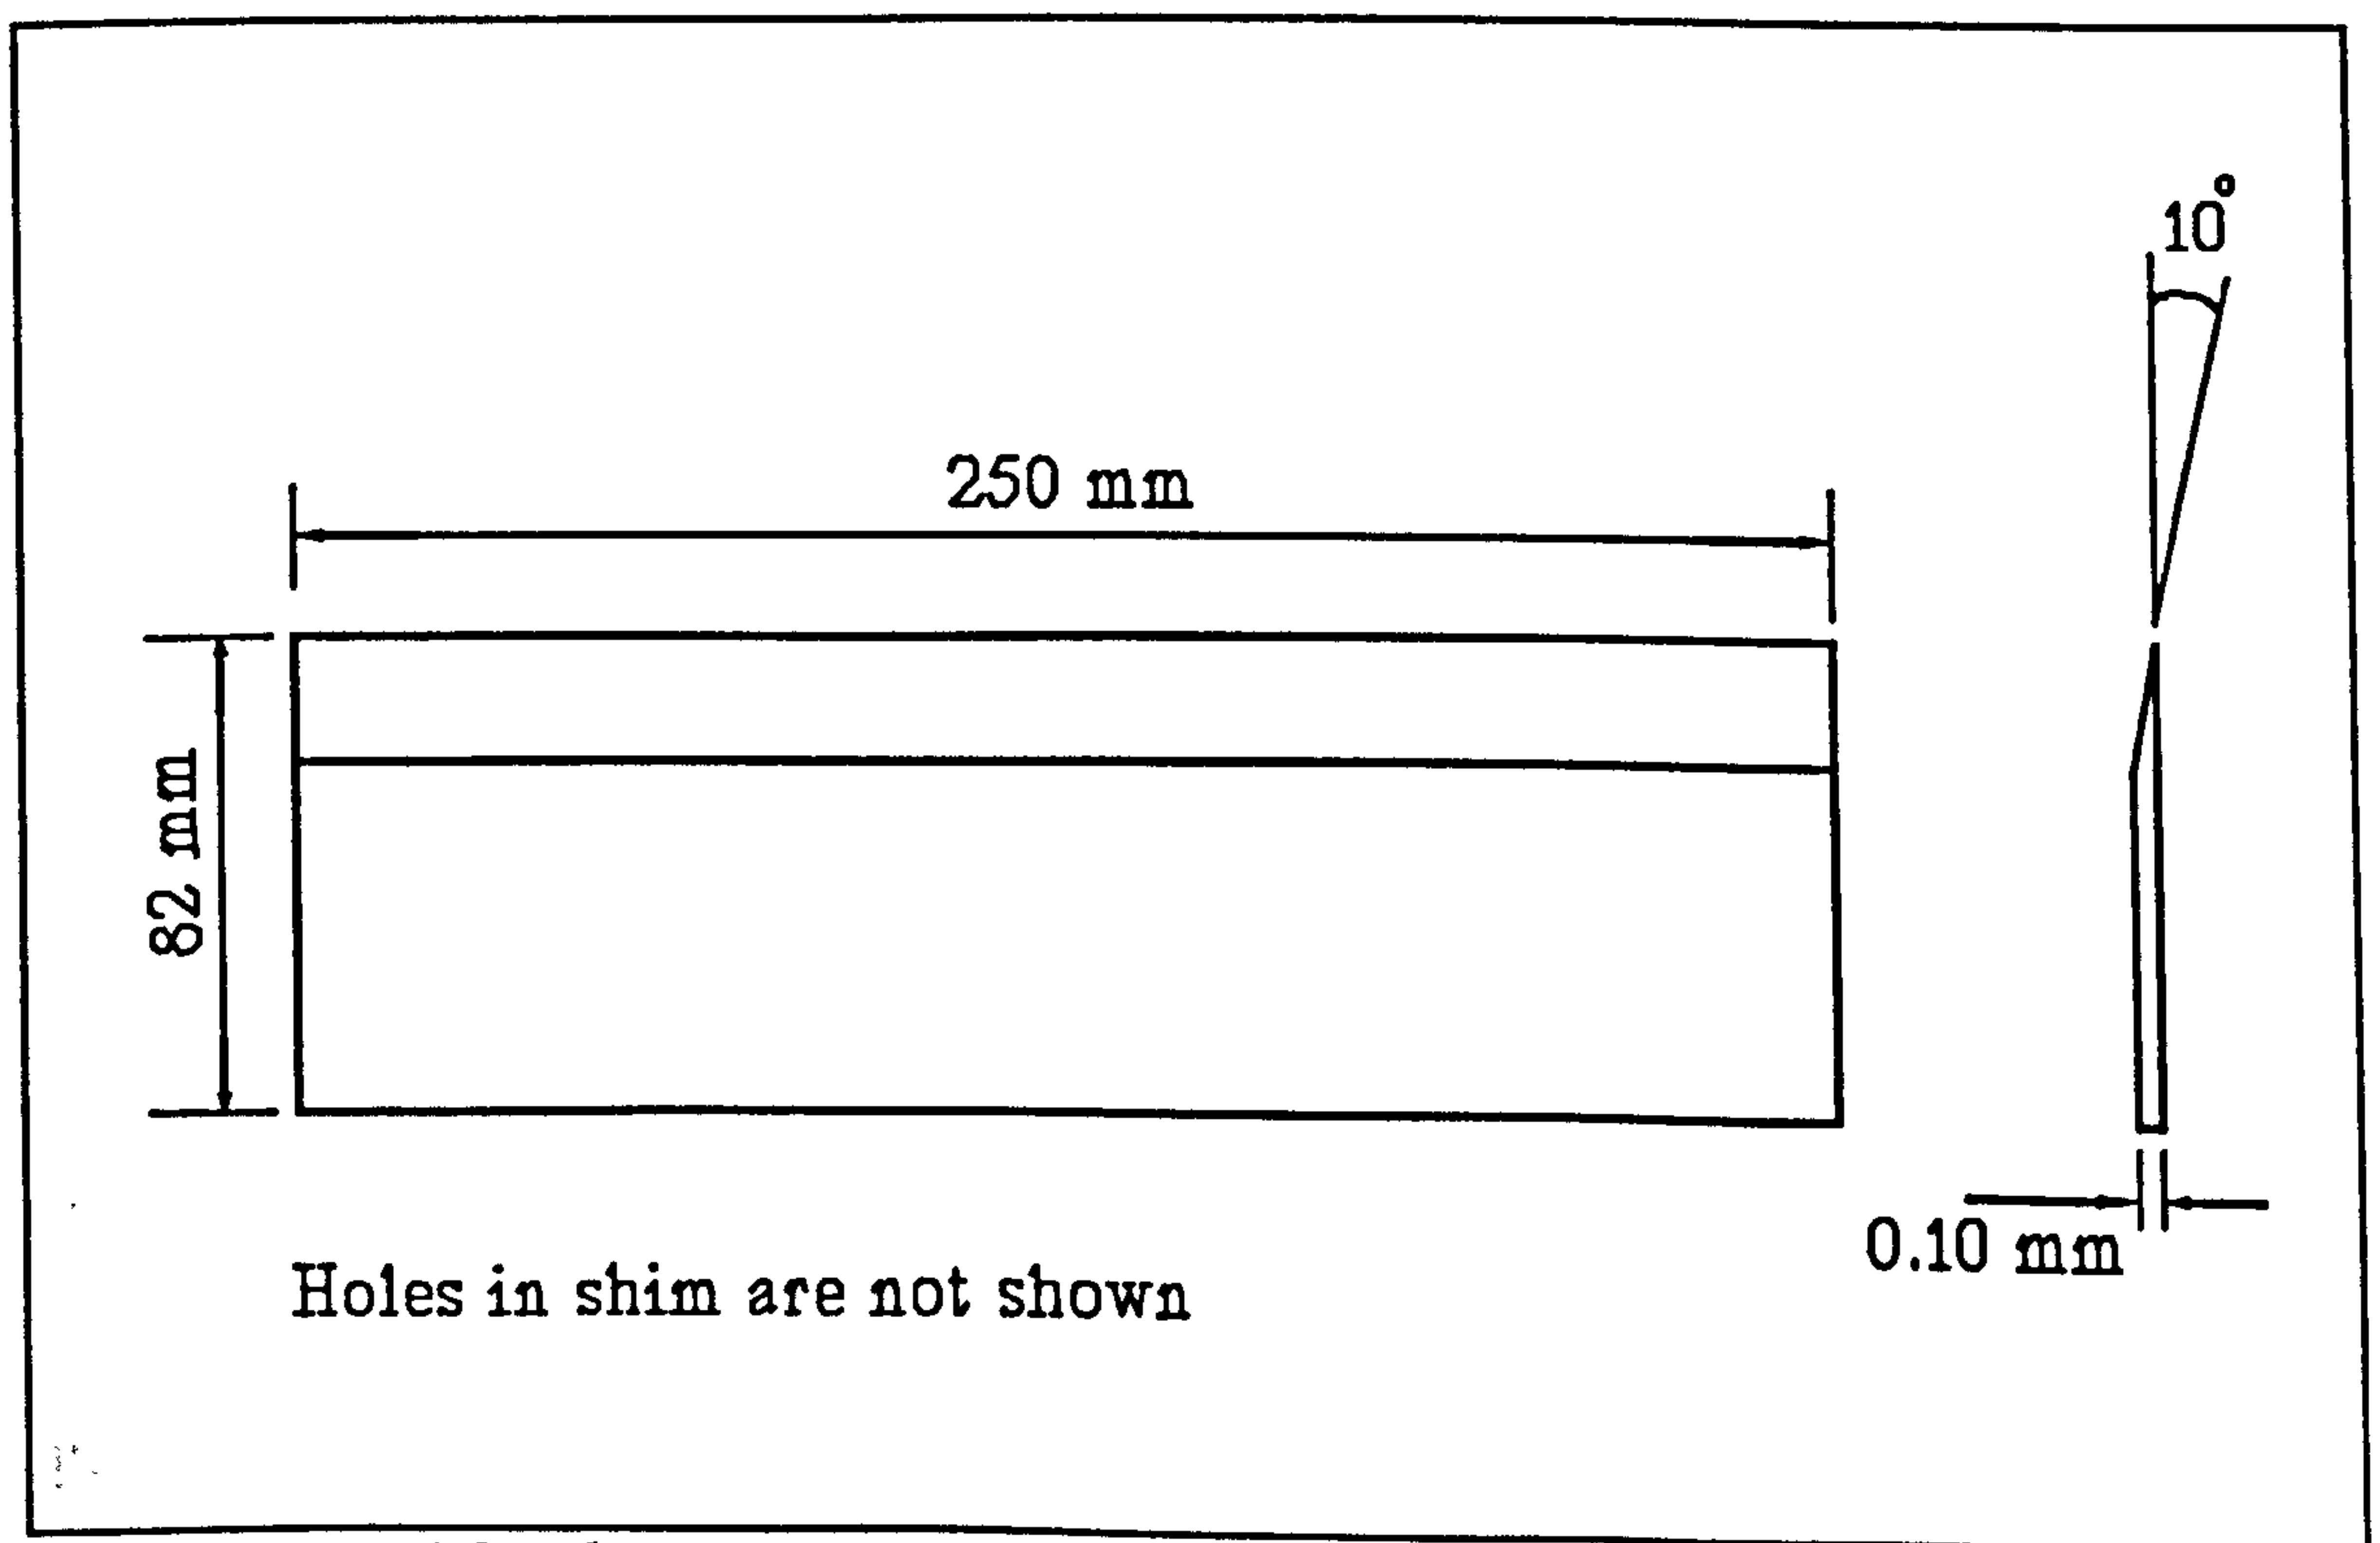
The sharpened shim used for the casting of the CMM specimen.
